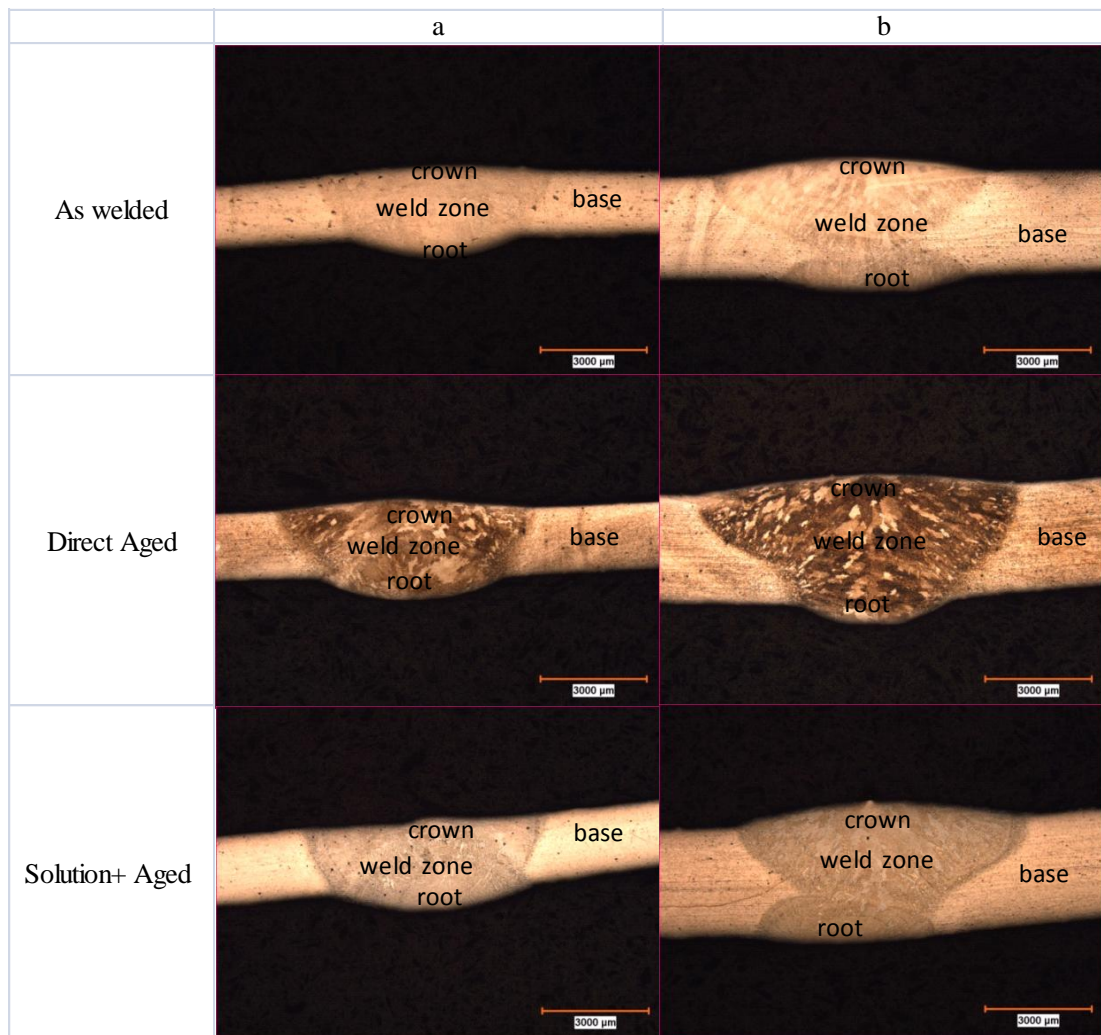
Cross section macrophotos of TIG welded Inconel 718 alloy in different heat treatment conditions with (a) 2 mm (b) 3,2 mm base material thickness.
